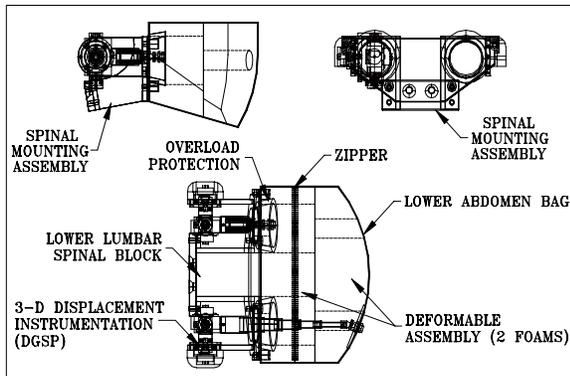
Lower Abdominal Assembly Showing Integral DGSP 3D Instrumentation
